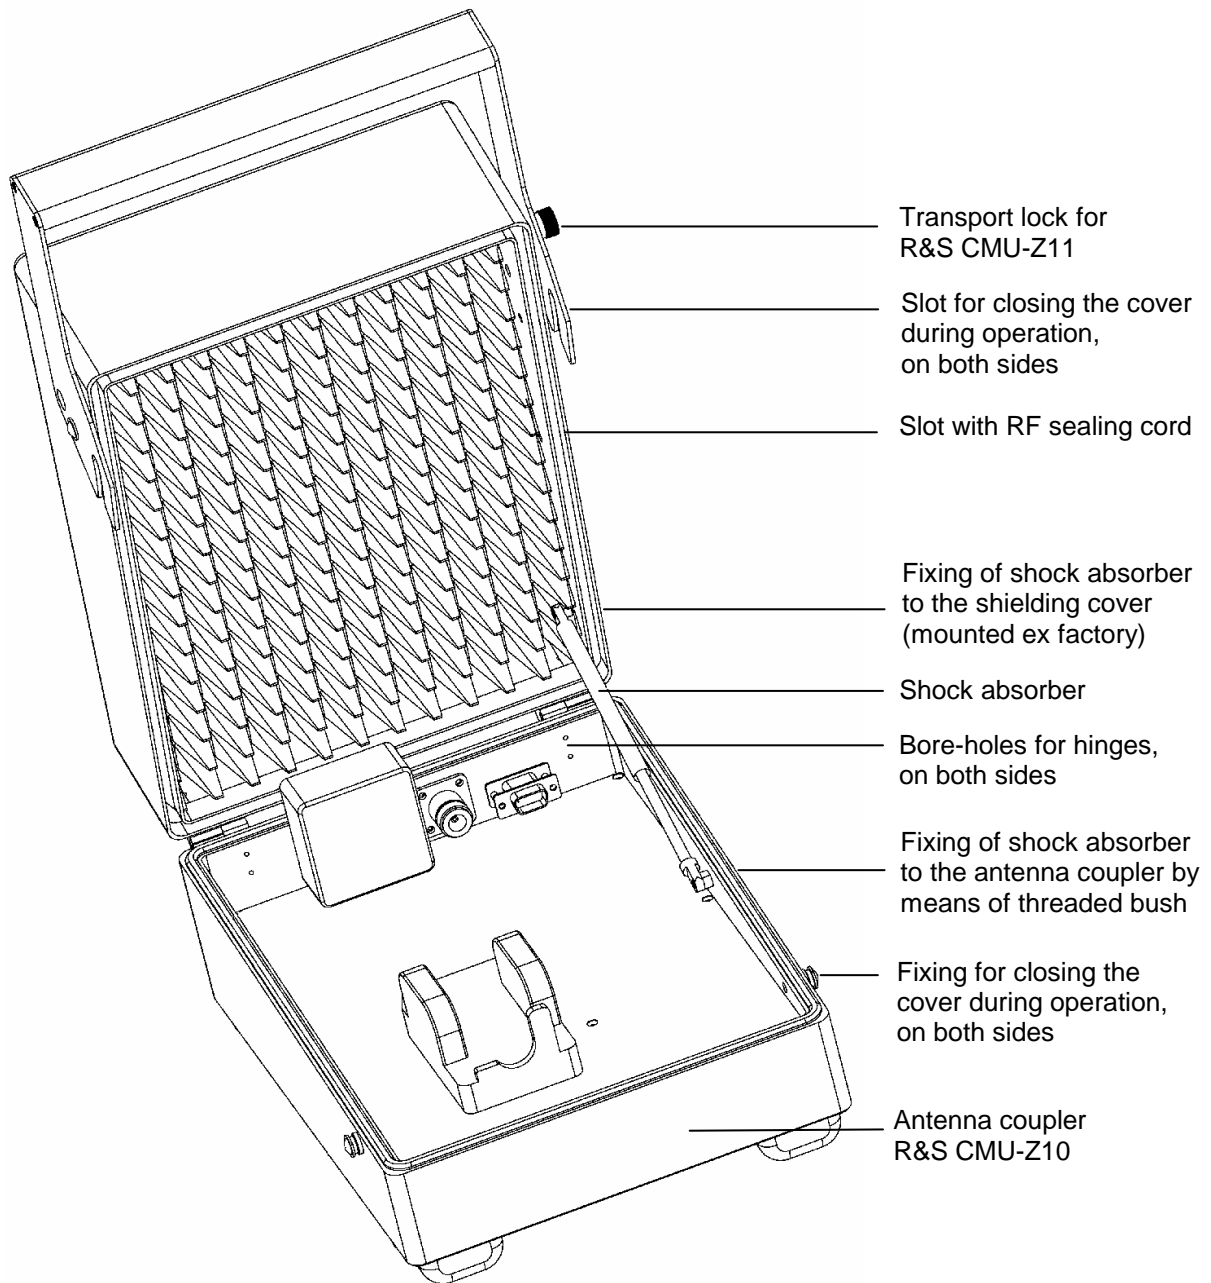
Mounting the RF shielding cover R&S® CMU-Z11
